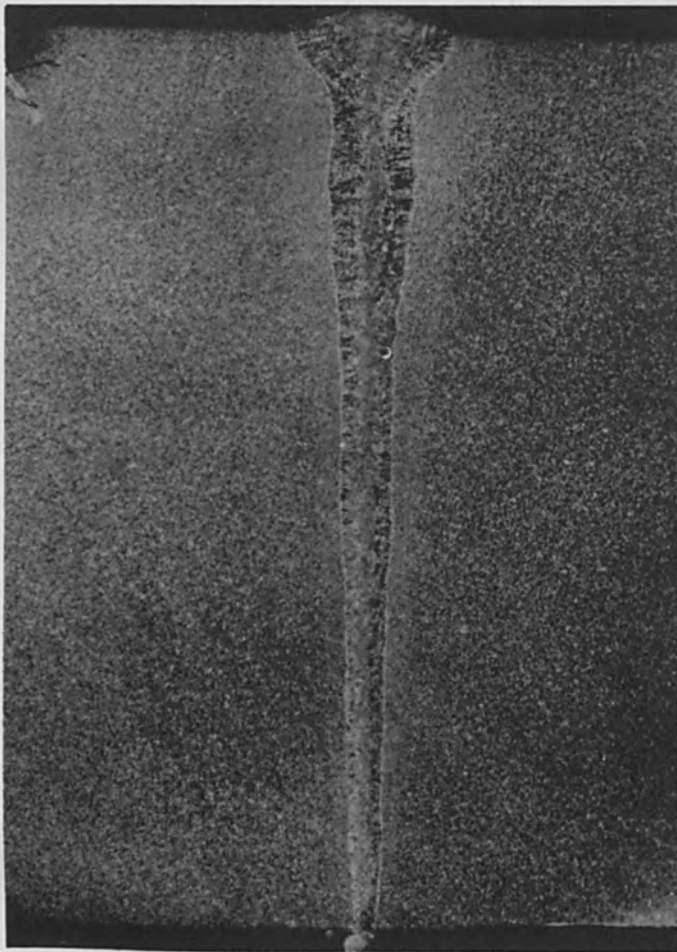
Cross section of One-Pass Weld in 0.4" Thick Stainless Steel Using 2 Kw Electron Beam Welder<sup>(24)</sup>
